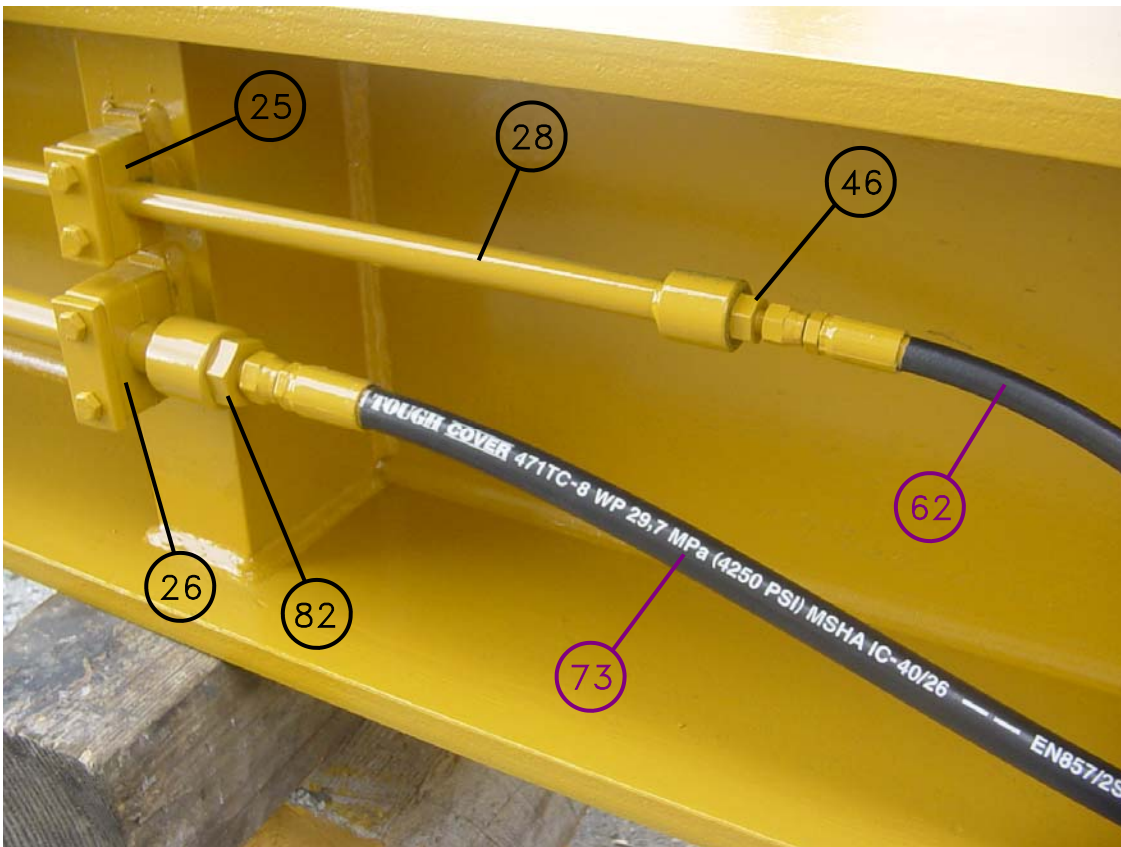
TOP WINCH – DRAIN & SIGNAL PLUMBING
